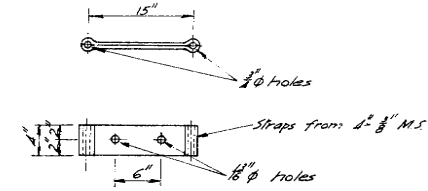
DETAIL OF COUNTER WEIGHT ARRANGEMENT
